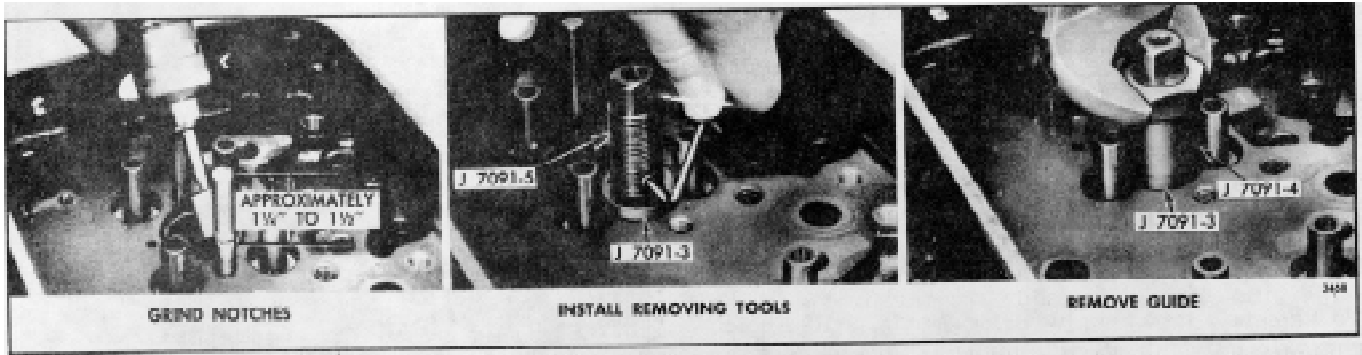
Removing Press-Fit Exhaust Valve Bridge Guide
